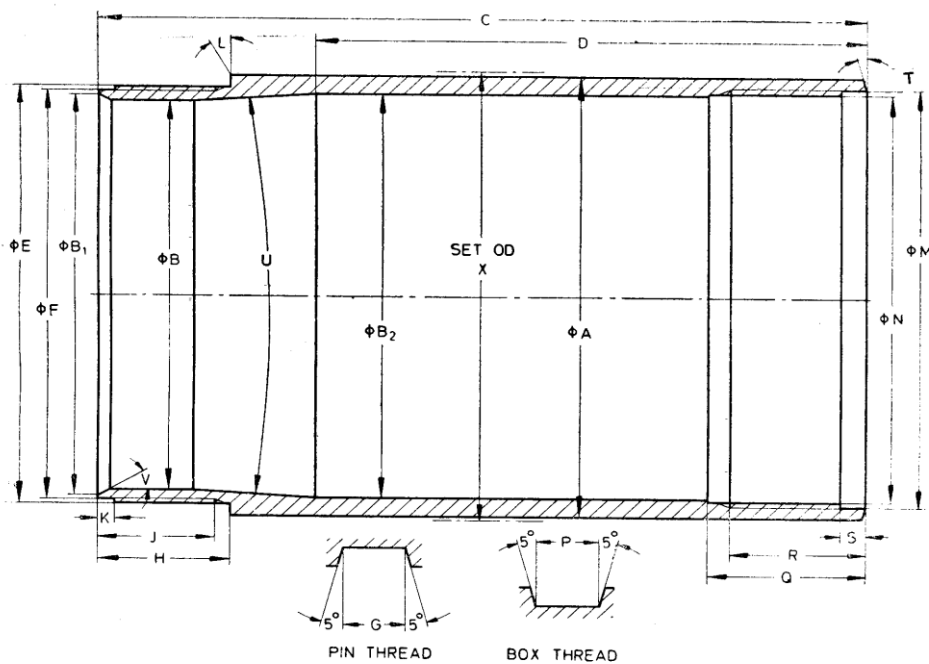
'WF' DESIGN DOUBLE TUBE CORE BARREL — REAMING SHELL
